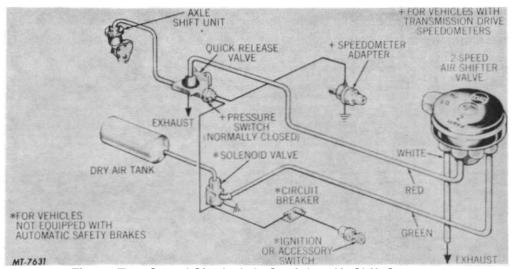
Two-Speed Single Axle Straight - Air Shift System.
